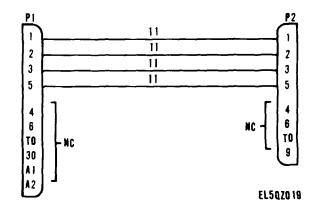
Cable Assembly, Special Purpose, Electrical 217-803023-000(4W1), Wiring Diagram.
